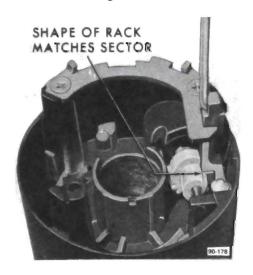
Rack and Lock Bolt Assembled to Sector
